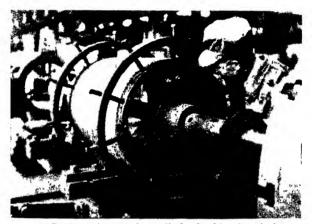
Boring a locomotive-cylinder bushing in a lathe.
